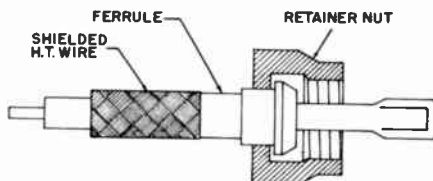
Threaded fitting at the terminal of a cable shield.
